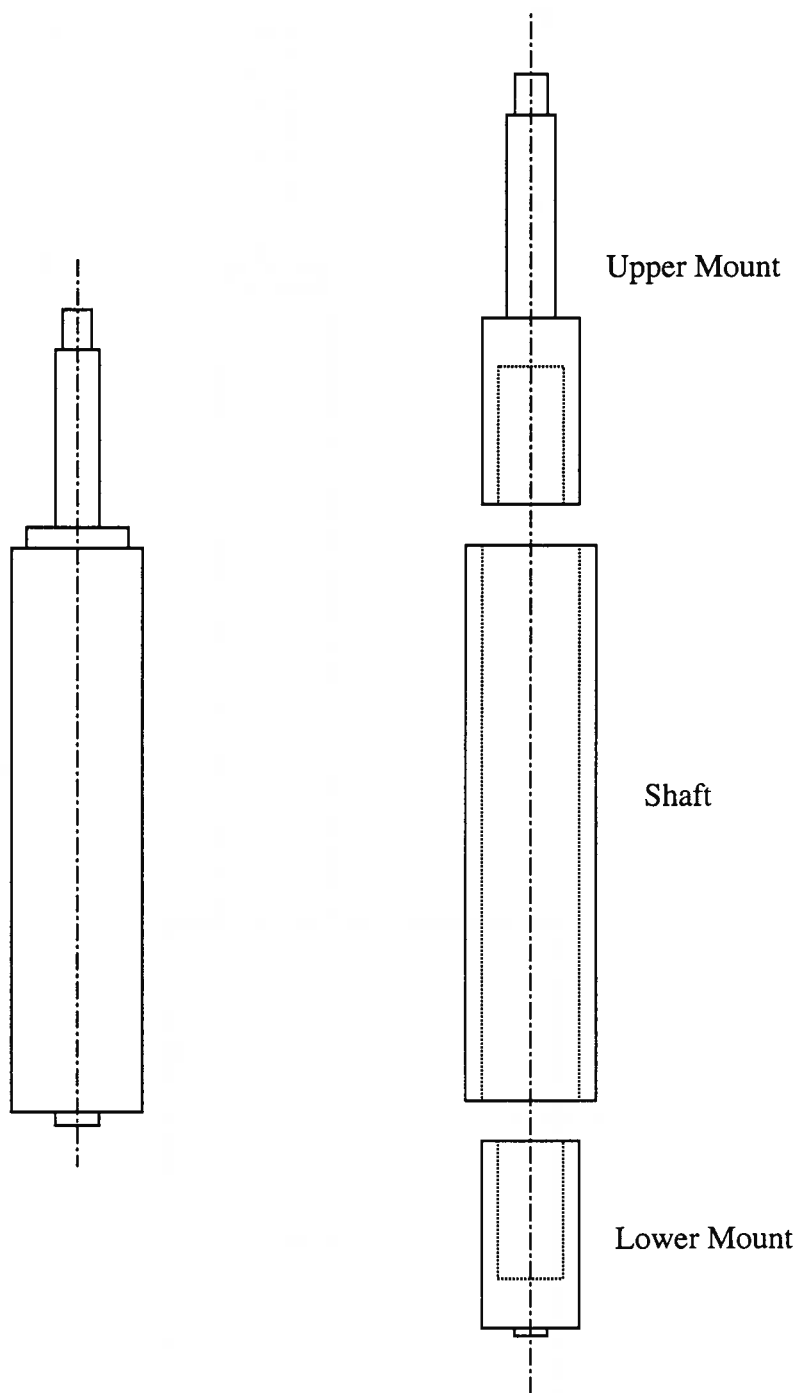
Assembled and Exploded Views of End-Effector Shaft System
